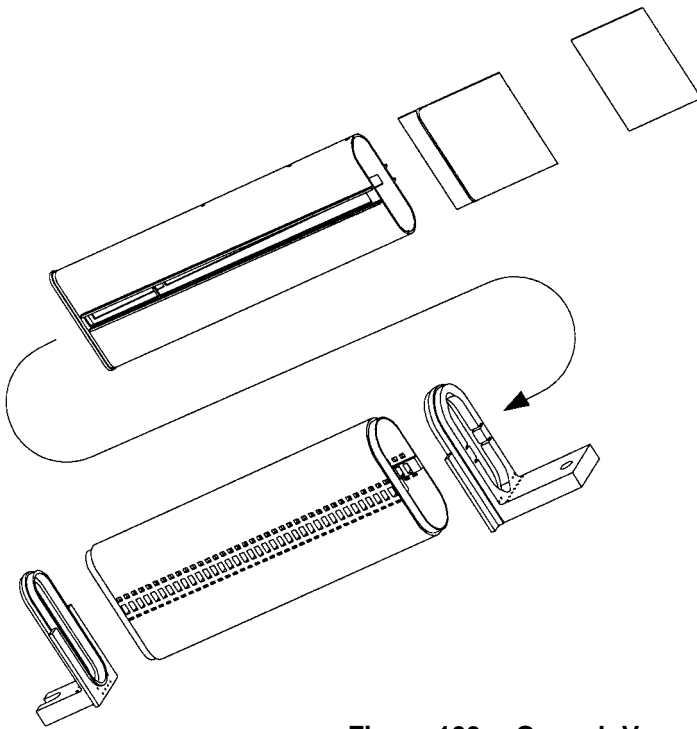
Quench Vane Assembly for Product Module Rig Build 2
